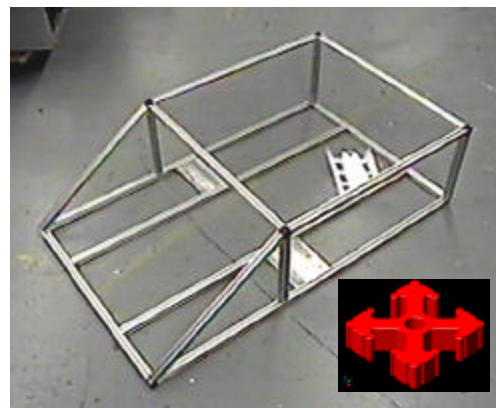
Maximus' frame and a cross-section of aluminum stock (bottom right) shown.
